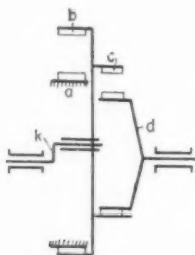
KOMMER PLANETARY GEAR, SECOND TYPE
